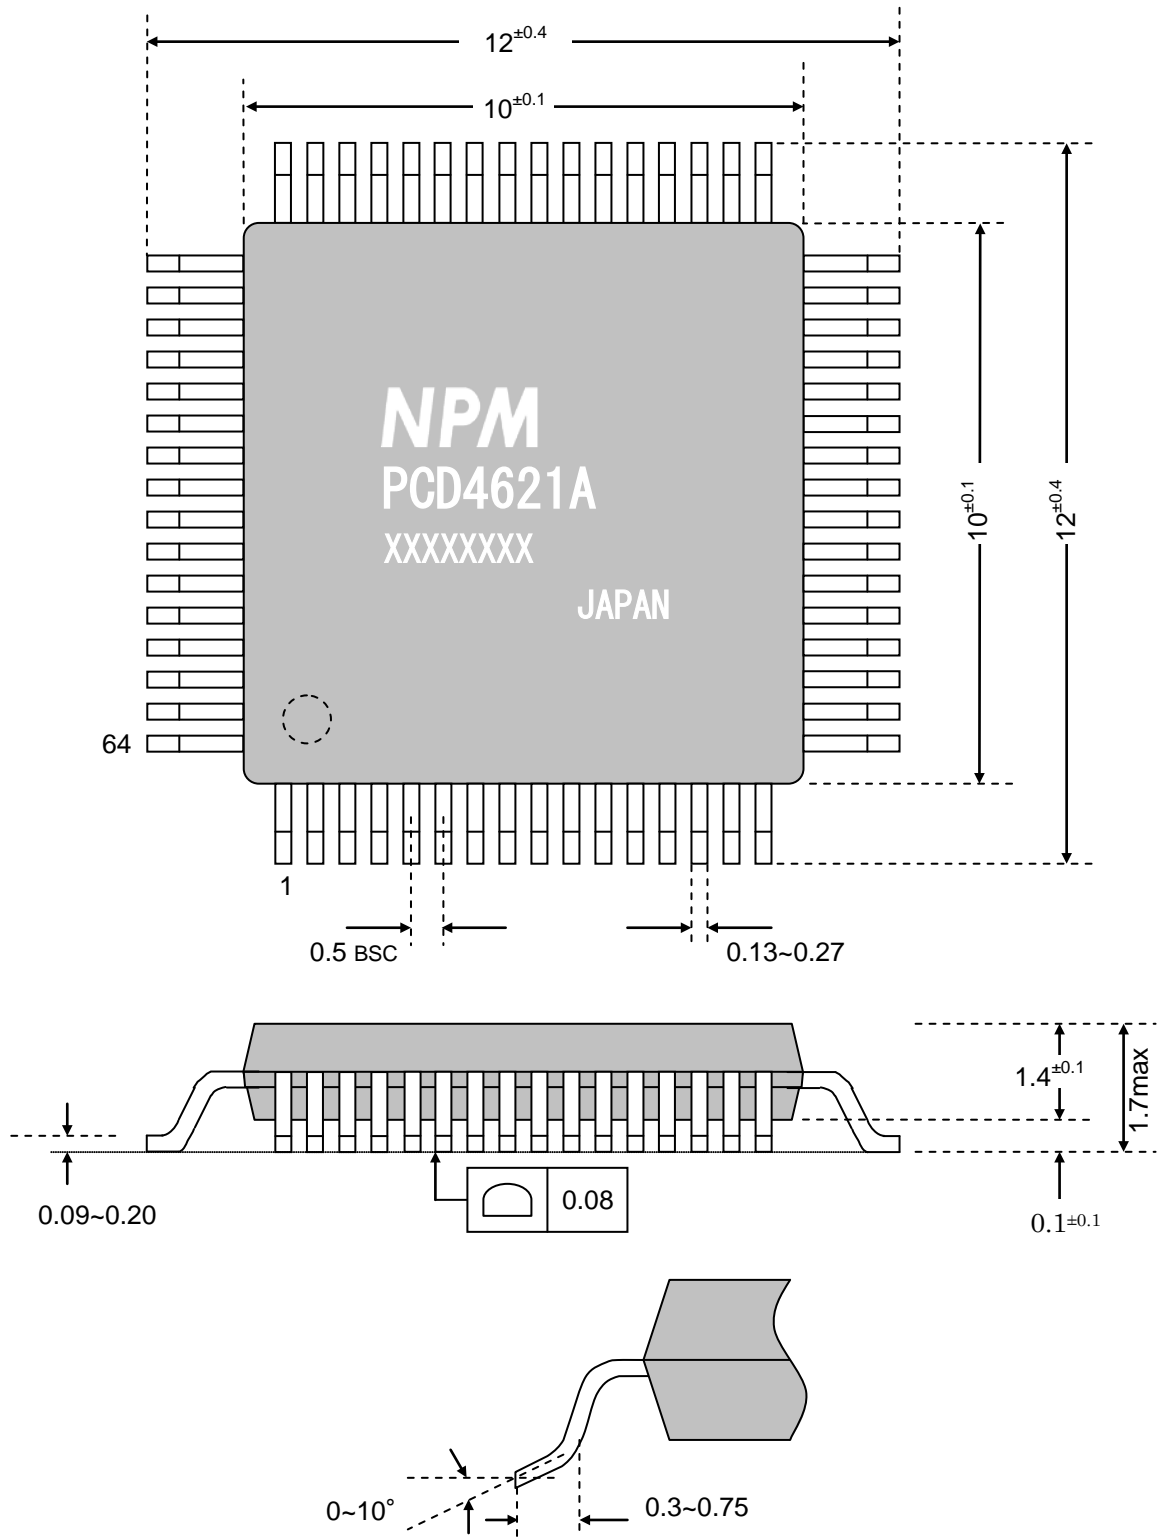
PCD4621A external dimensions (64-pin QFP)
